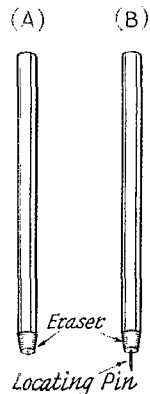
A tool for cleaning pin connections on a printed circuit board (A), and one for cleaning holes in a board after a component has been removed (B).
